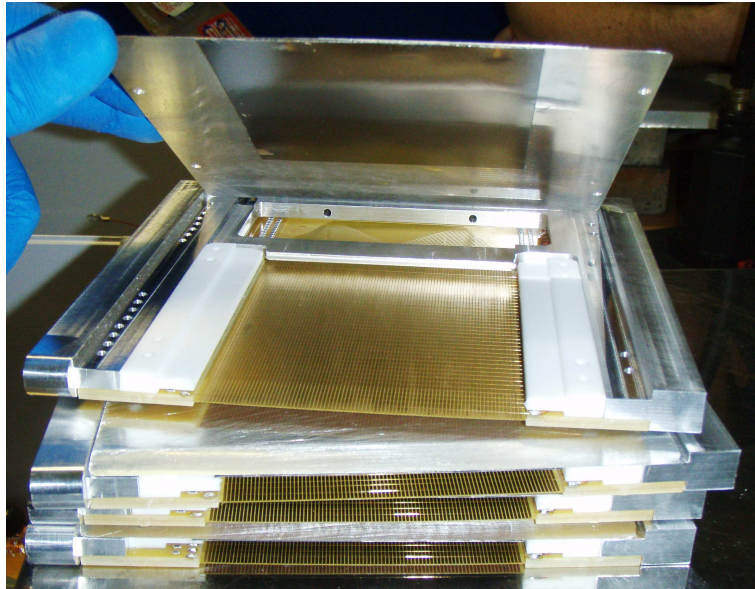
Four cassettes assembled. The read-out PCB is installed on the Aluminium holder.
